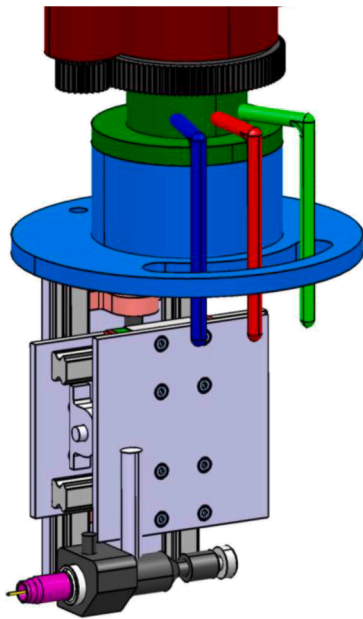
Detail of the welding torch and the motorized motion system to allow the tip of the torch.
